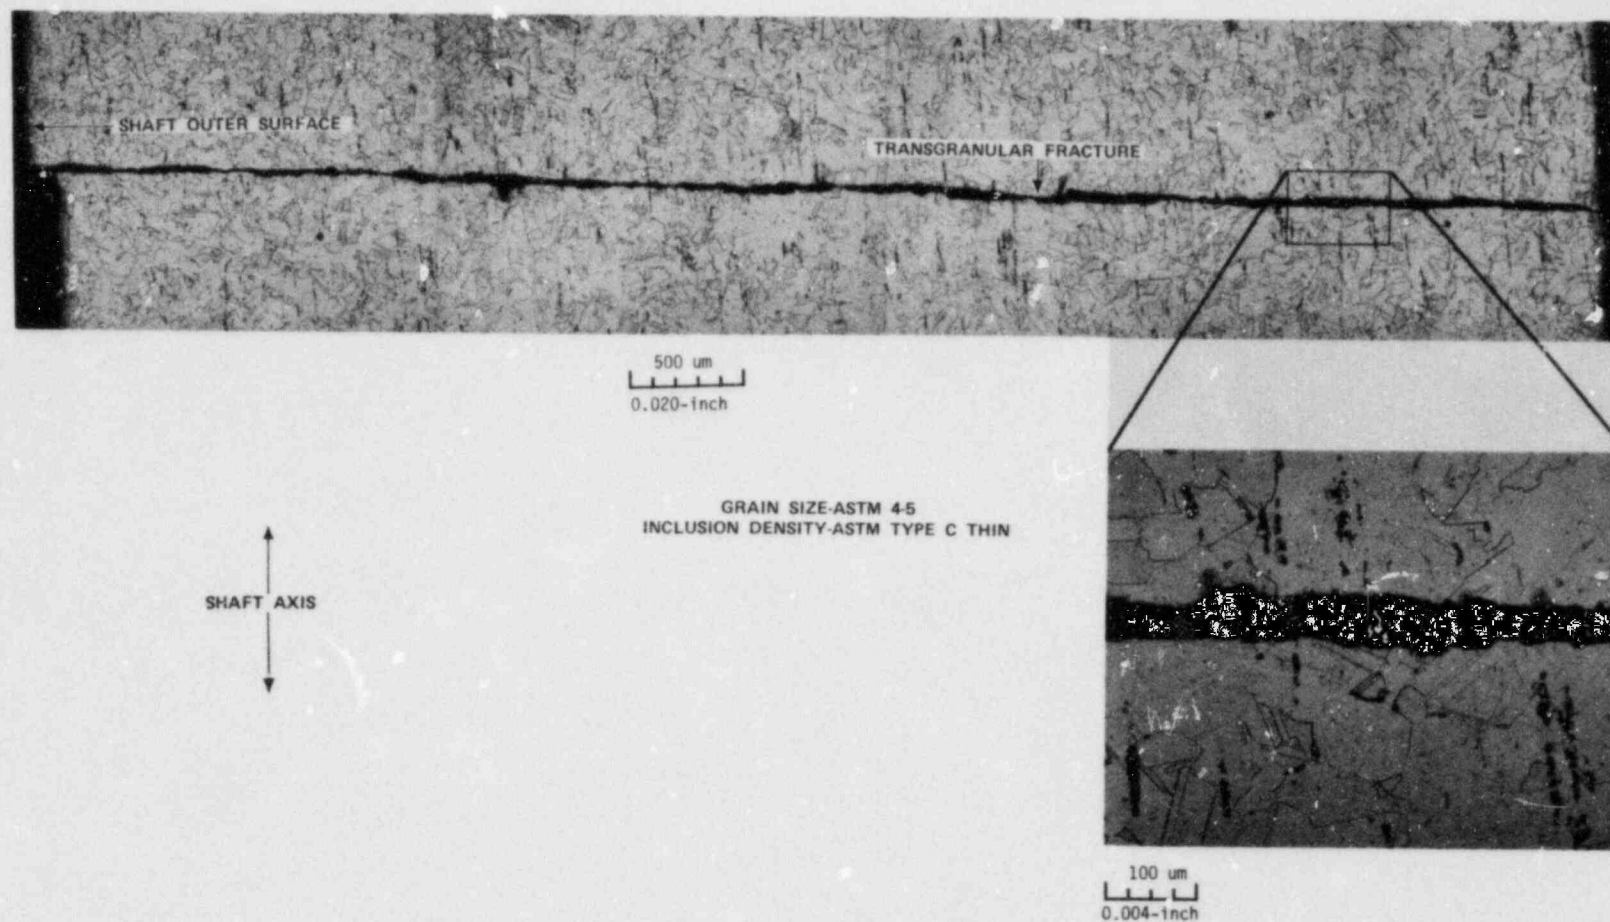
Longitudinal View of Specimen A1A-1
